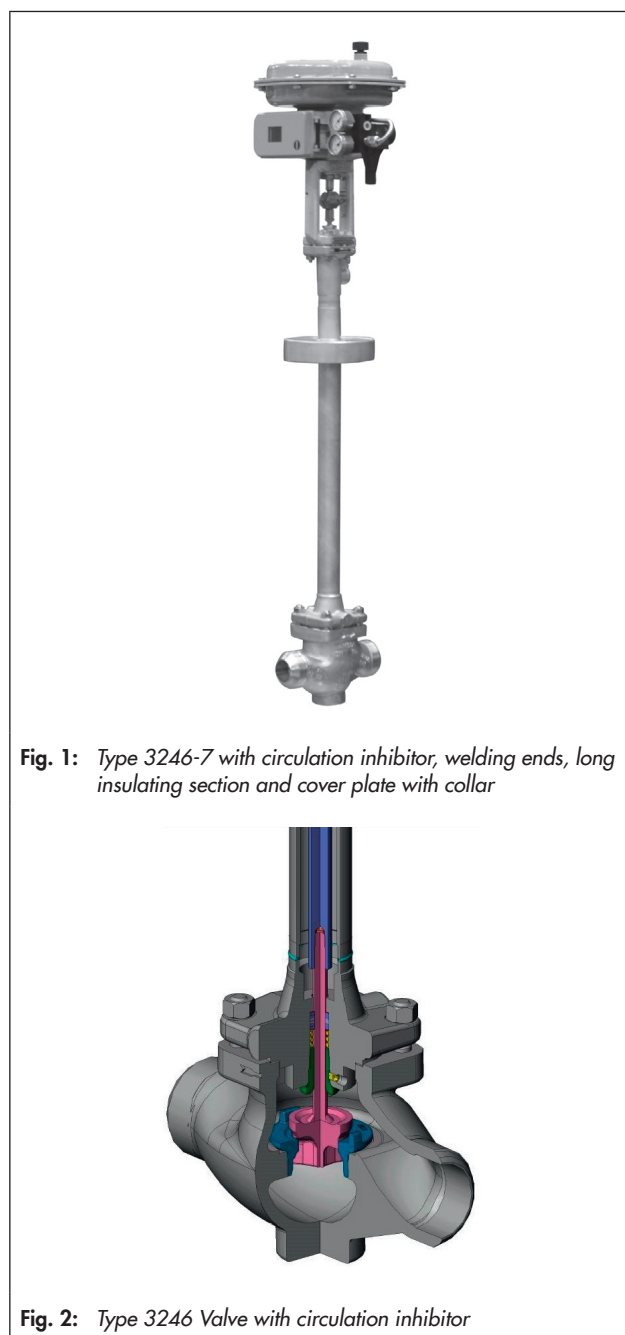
Type 3246-7 with circulation inhibitor, welding ends, long insulating section and cover plate with collar
